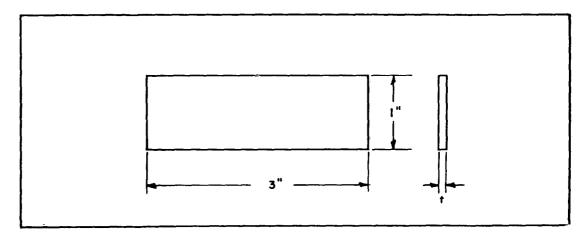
Sheet 105-Degree-Angle Bend Test Specimen
